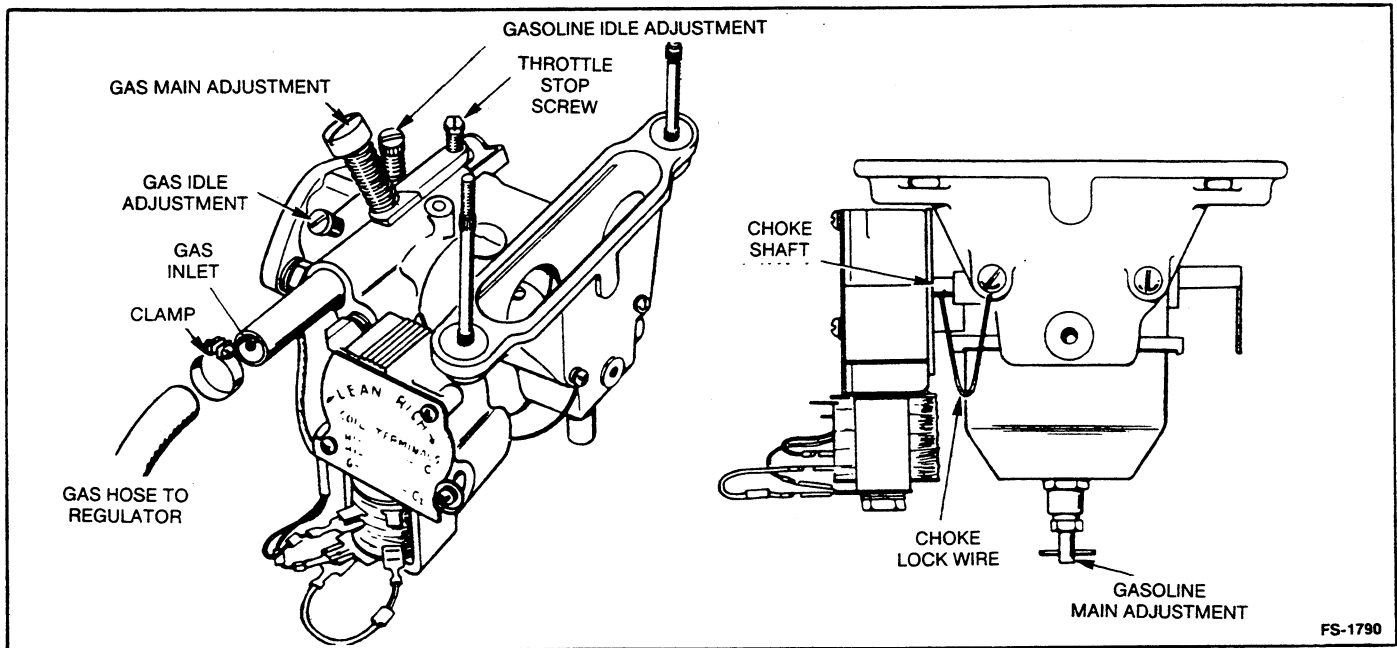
GAS-GASOLINE CARBURETOR ADJUSTMENT
